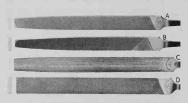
Machinists' files: (A) Mill file; single cut, used for draw filing and finishing; (B) Flat file; double cut, for generatowrk; (C) Half round file; double cut, used to file curved surfaces; (D) Hand bastard file; double cut, for finishing flat surfaces; tabs has one safe edde (without teet).
